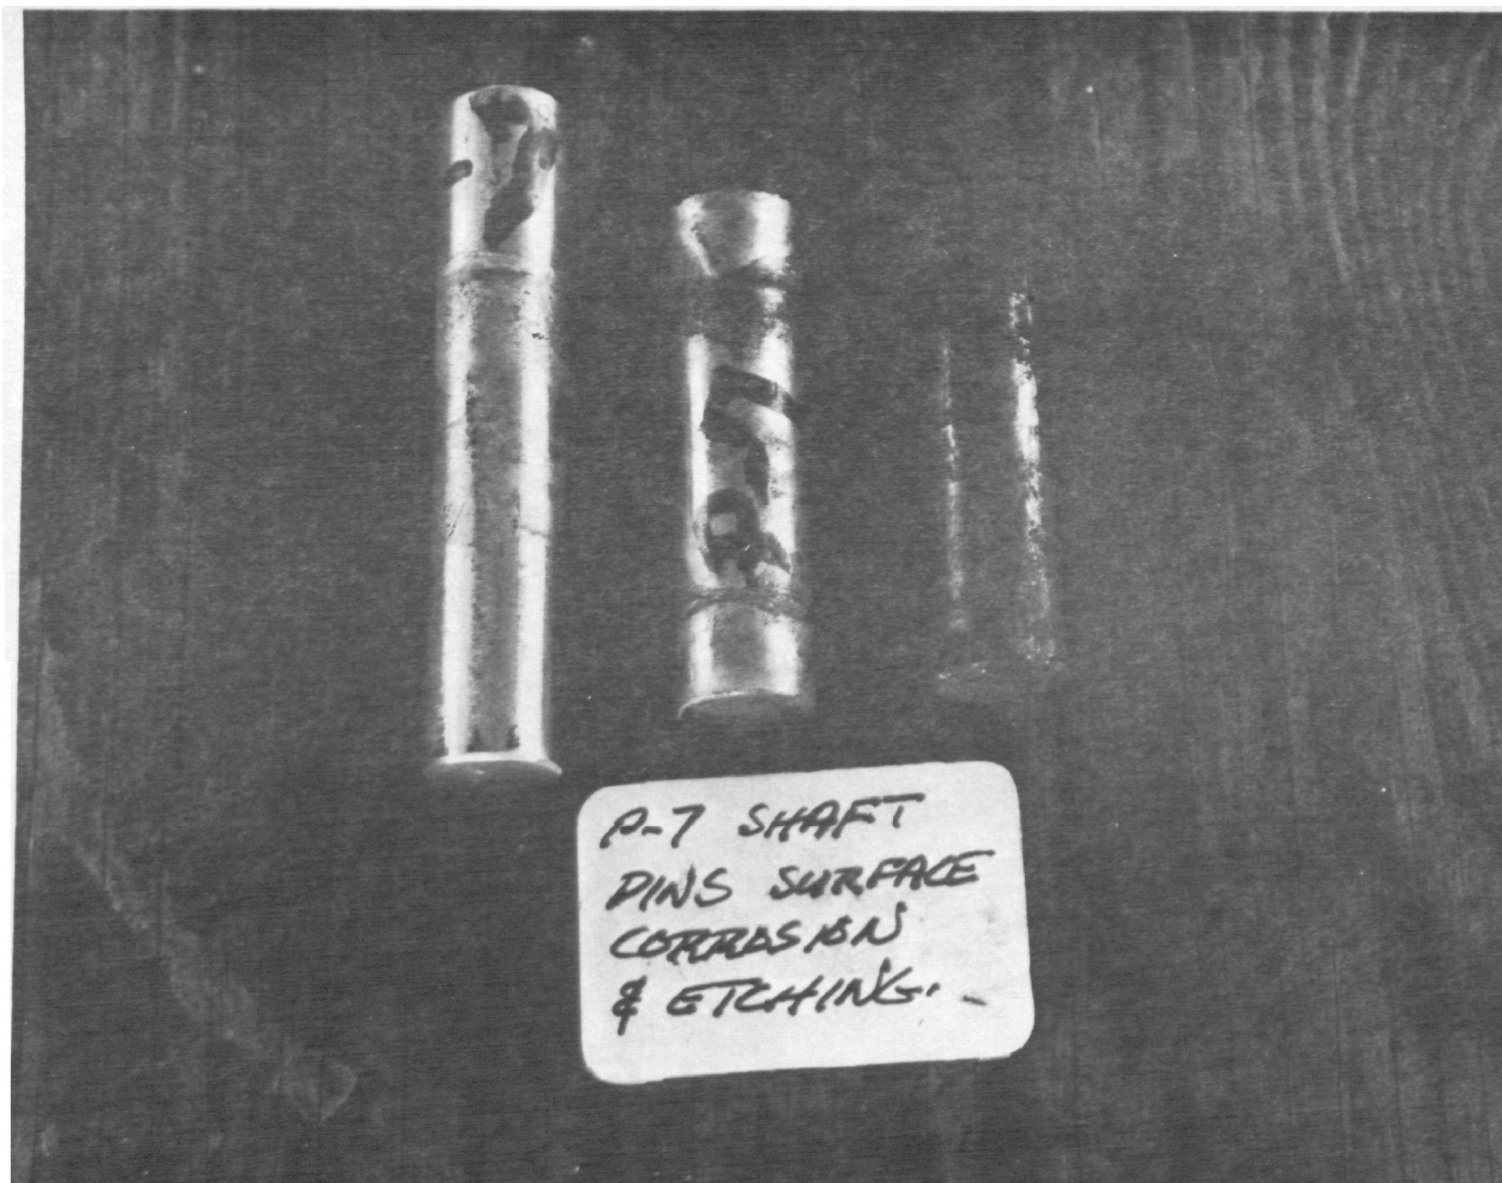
Shaft Pins from Slurry Feed Pump P-7.
